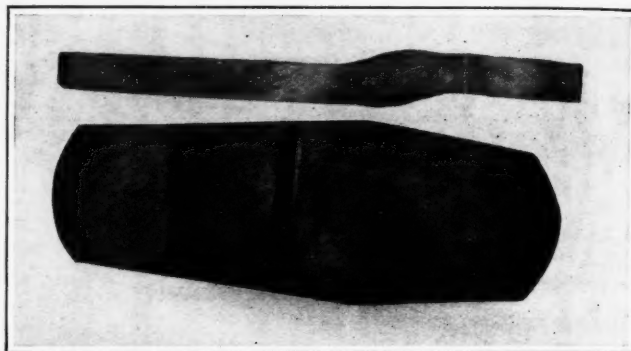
Example of Tapered Forging rolled on Machine shown in Fig. 4
